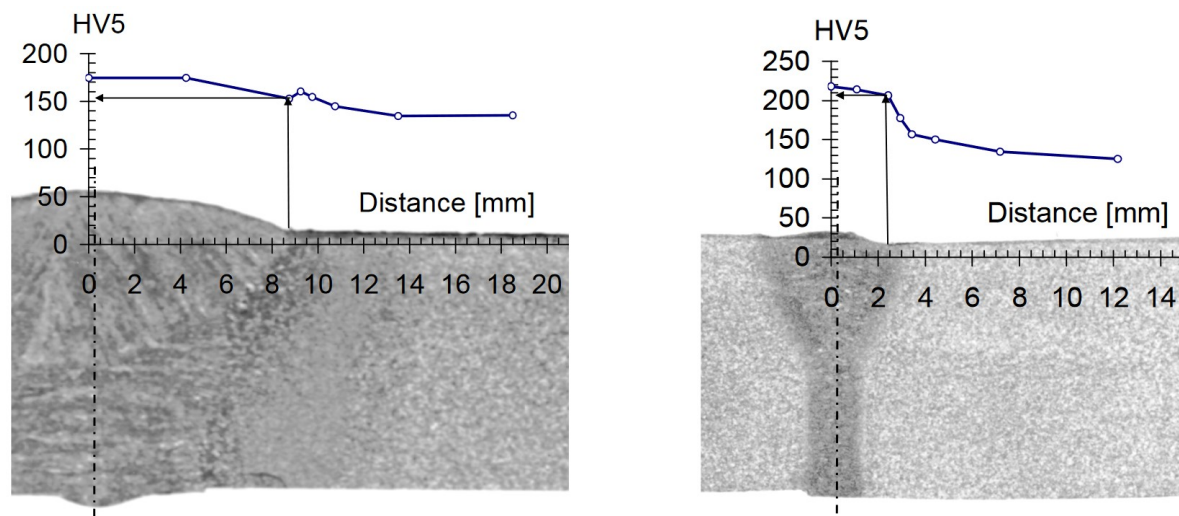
Hardness profile of SAW and Laser welding (Remes et al., 2008)
